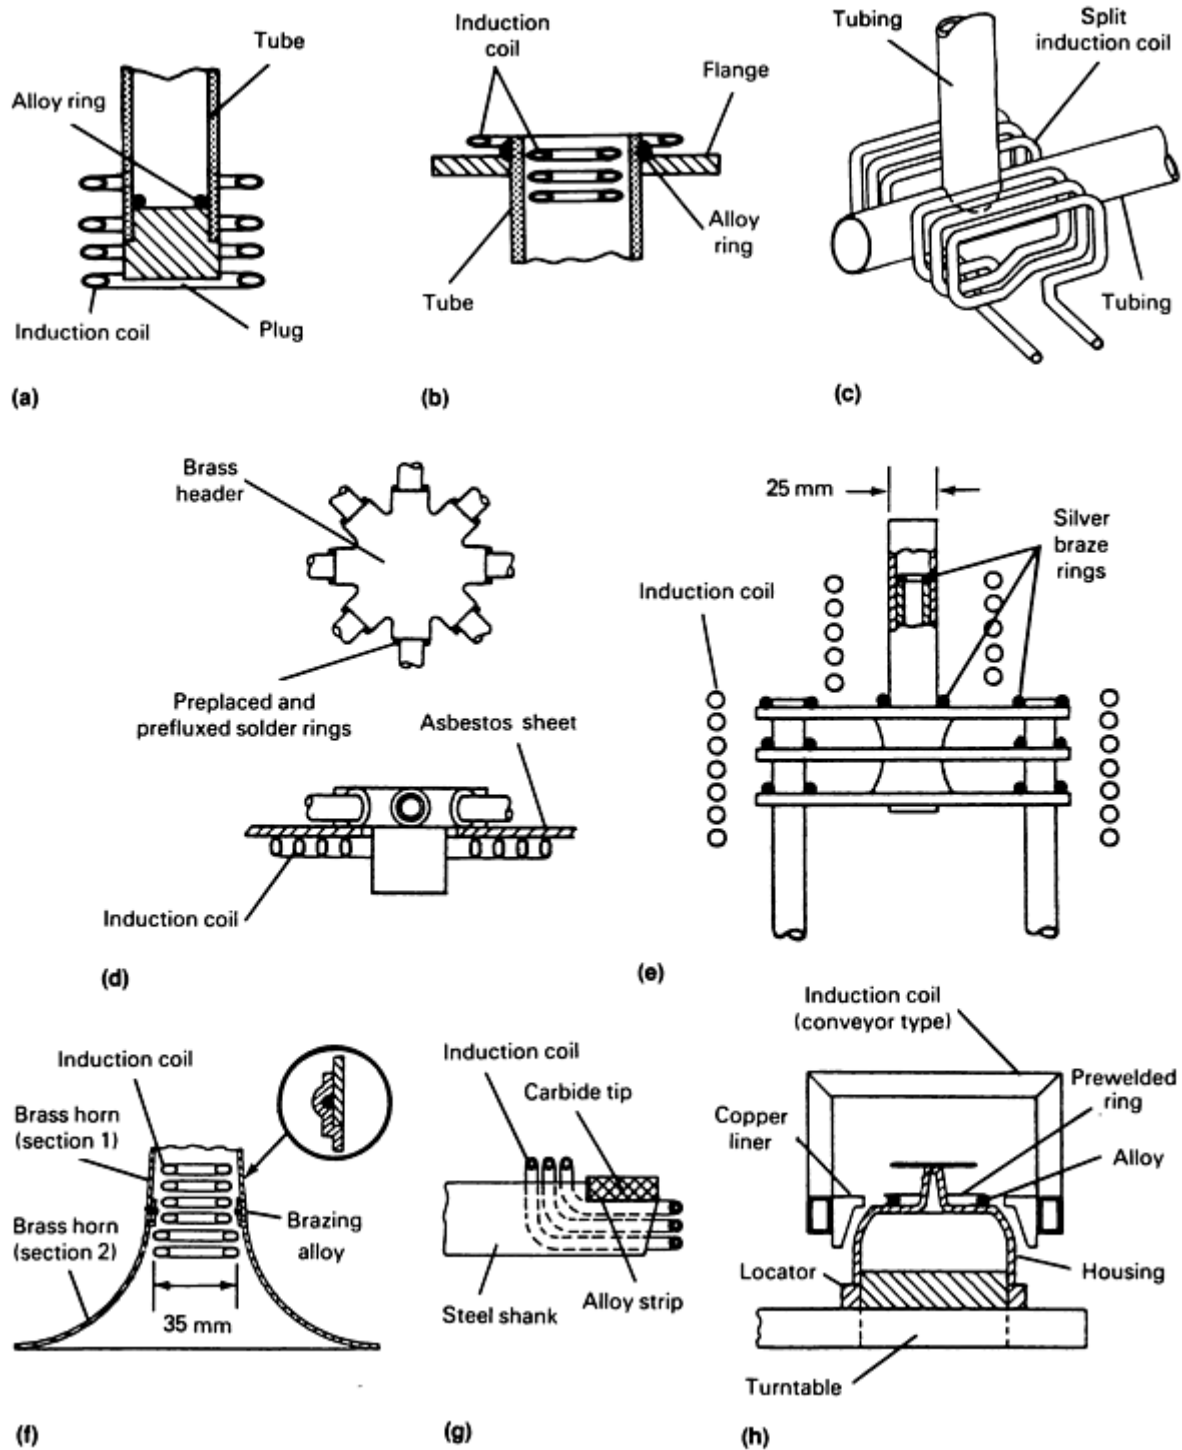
TYPICAL COIL AND JOINT CONFIGURATIONS USED IN INDUCTION BRAZING. (A) SOLENOID COIL FOR PLUG-TO-TUBE JOINT (NOTE LOCATION OF BRAZING ALLOY RING). (B) INTERNAL-EXTERNAL COIL FOR FLANGE-TO-TUBE JOINT (FLANGE CHAMFERED TO ASSIST PREPLACED ALLOY RING). (C) SPLIT SOLENOID COIL FOR TUBE-TO-TUBE T-JOINT (BRAZE RING PREPLACED INTERNALLY TO PROVIDE UNIFORM FILLET). (D) PANCAKE OR PIE WOUND COIL FOR HEATING BRASS HEADER TO PERMIT SIMULTANEOUS BRAZING OF EIGHT COPPER TUBES TO HEADER. (E) EXTERNAL COILS FOR SIMULTANEOUS PRODUCTION OF A NUMBER OF BRAZED JOINTS. (F) FORMED INTERNAL COIL TO JOIN TWO SECTIONS OF MUSICAL HORN (SPECIAL JOINT DESIGN FOR PREPLACEMENT OF BRAZING ALLOY MAINTAINS SMOOTH JOINT ON OUTSIDE OF INSTRUMENT). (G) OPEN-END COIL FOR BRAZING CARBIDE TIPS TO SHANKS (ALLOY STRIP PREPLACED AS SHOWN). (H) CONVEYOR TYPE COIL FOR CONTINUOUSLY BRAZING FUSE ASSEMBLIES ON A ROTARY FIXTURE
